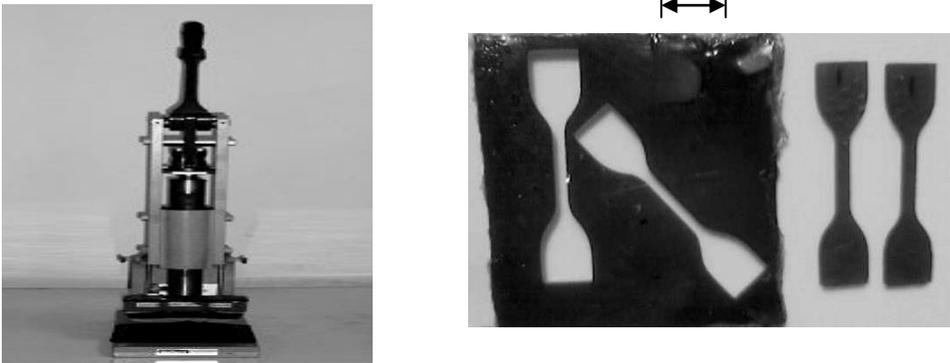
a) hand press. b) Sheet after cutting and specimen.
